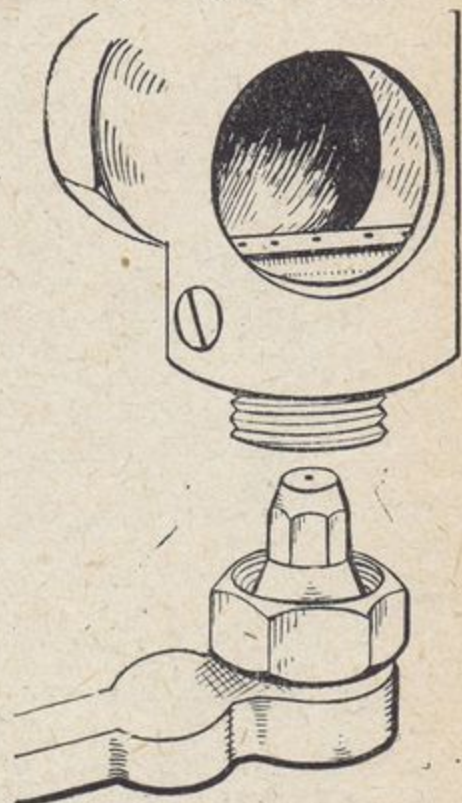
SHOWING SINGLE NOZZLE BELOW AND FIVE-SPRAY HOLES ABOVE ON THE AMAC.
